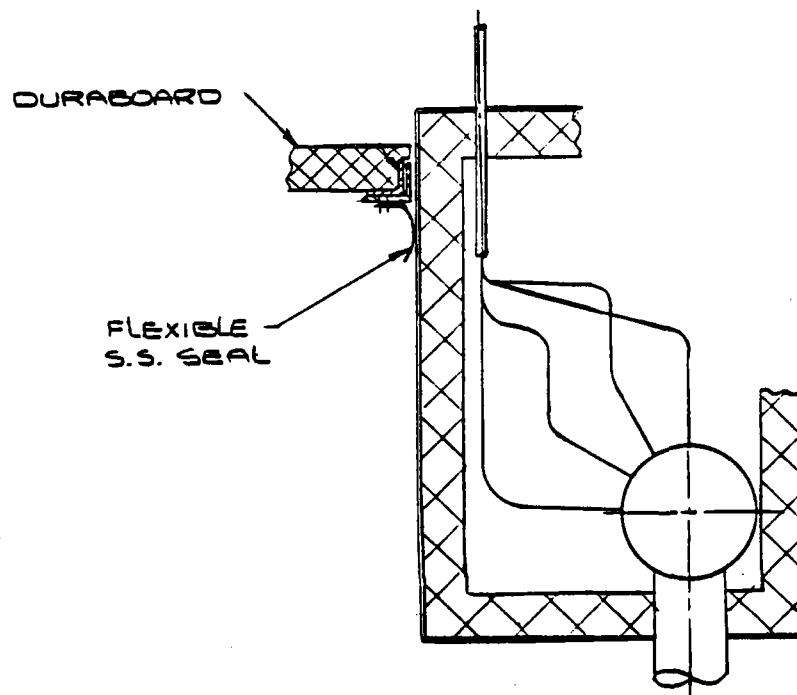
Seal Between Cavity Floor and Absorber Panels
